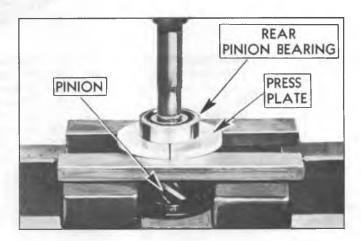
F--Pinion Rear Bearing Removal (11,000 Lb. Axle)
